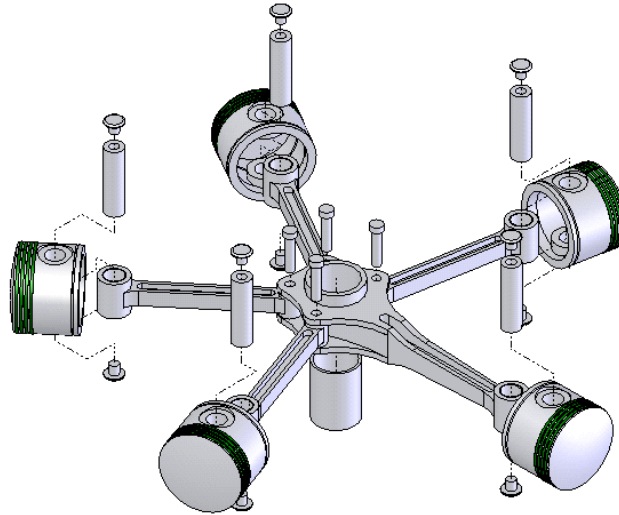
Explode line sketch added to the exploded state of the assembly
